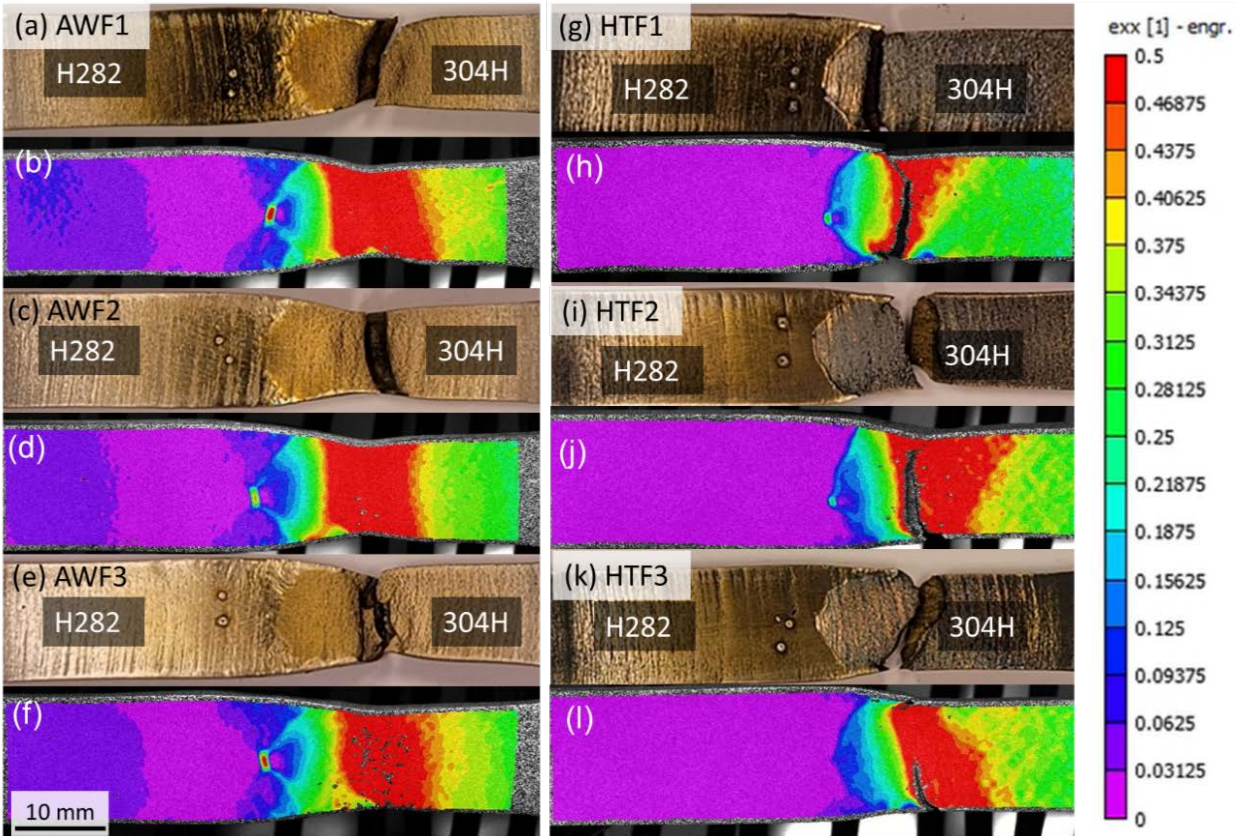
500°C tensile test AW and HT DIC results (a–b) AWF1 fracture location DIC engineering strain map, (c–d) AWF2 fracture location DIC engineering strain map, (e–f) AWF3 fracture location DIC engineering strain map, (g–h) HTF1 fracture location DIC engineering strain map, (i–j) HTF2 fracture location DIC engineering strain map, and (k–l) HTF3 fracture location DIC engineering strain map
